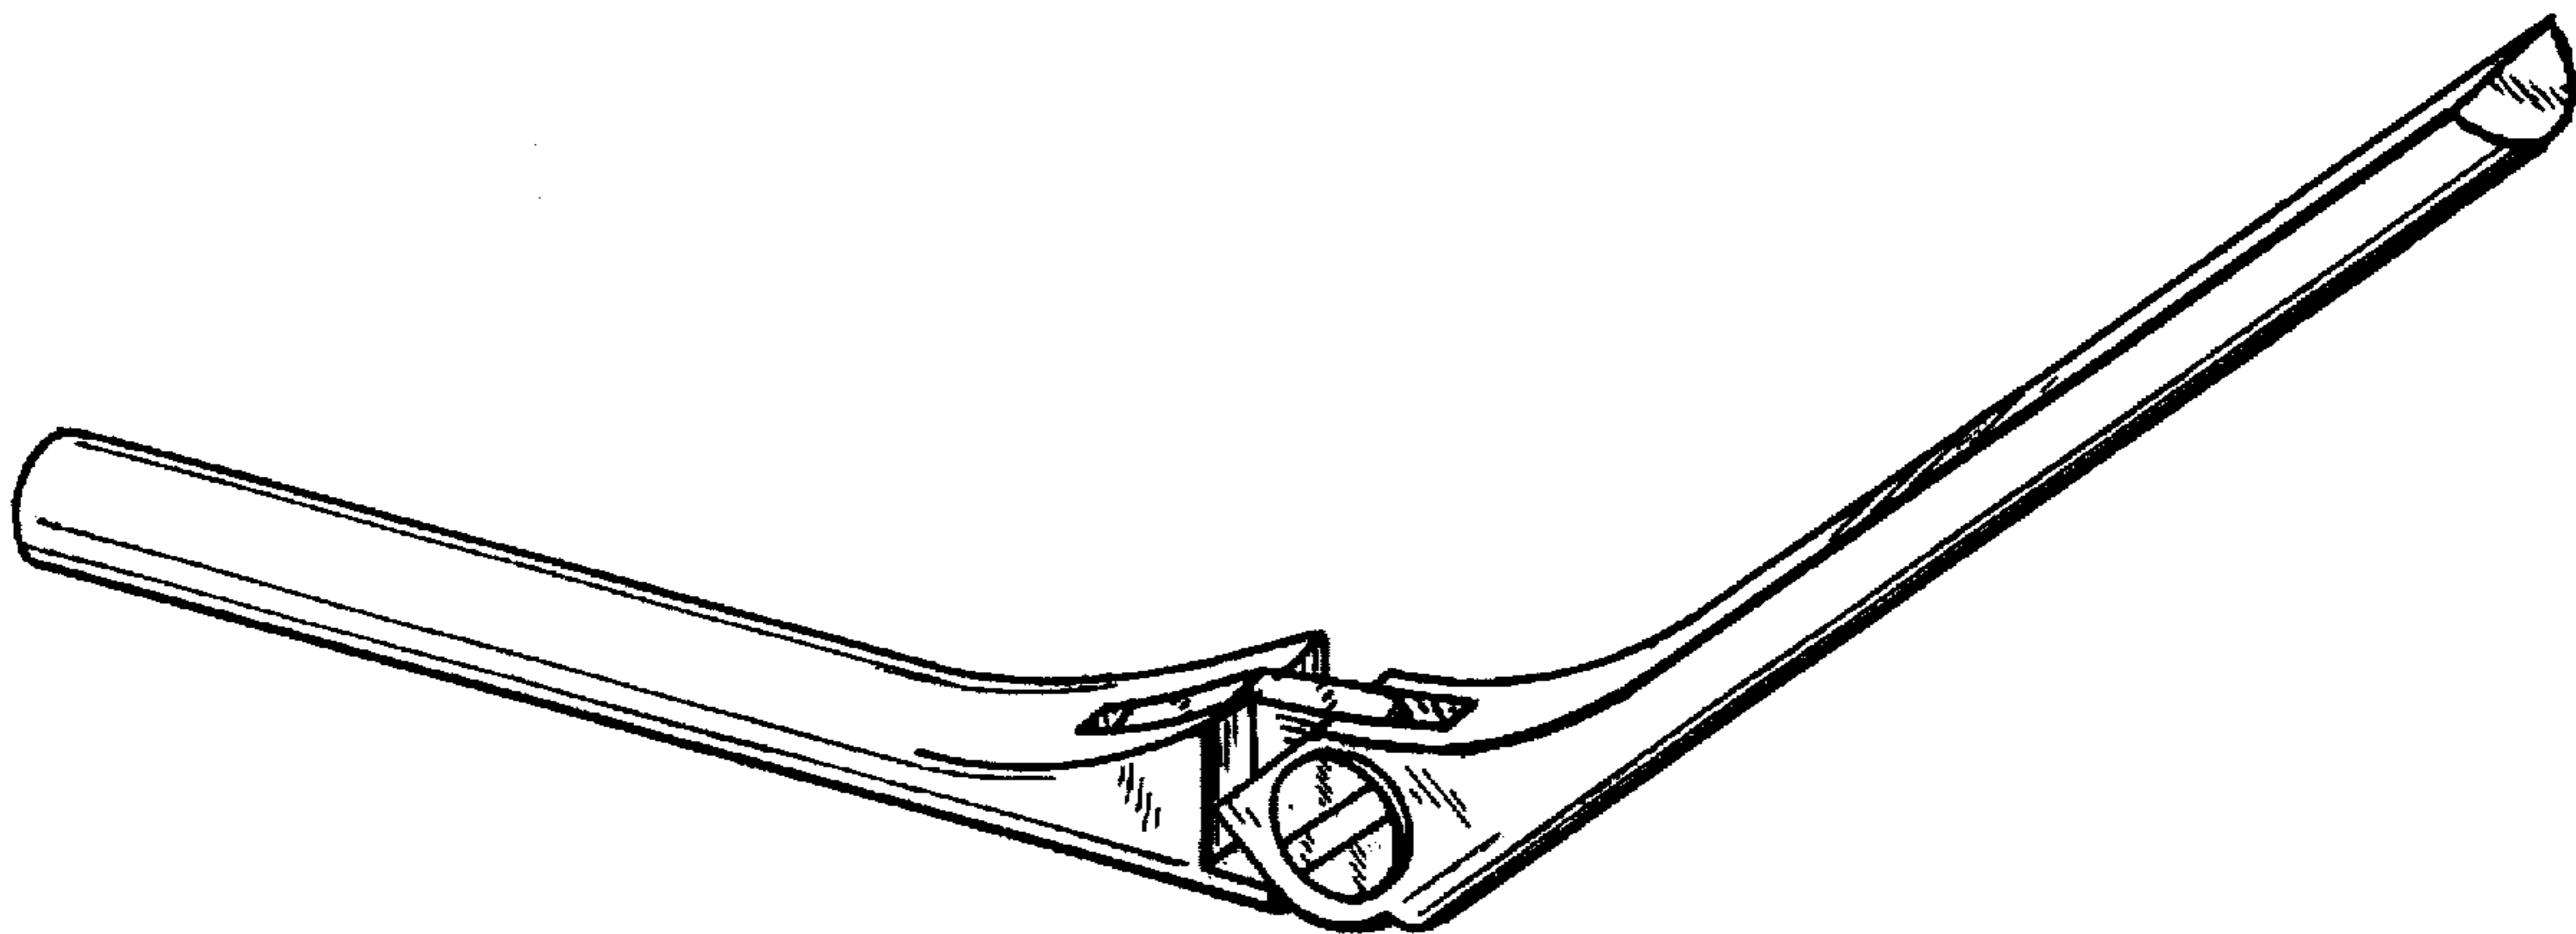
is a top, front, right-side perspective view of a spring hinge showing my new design;
